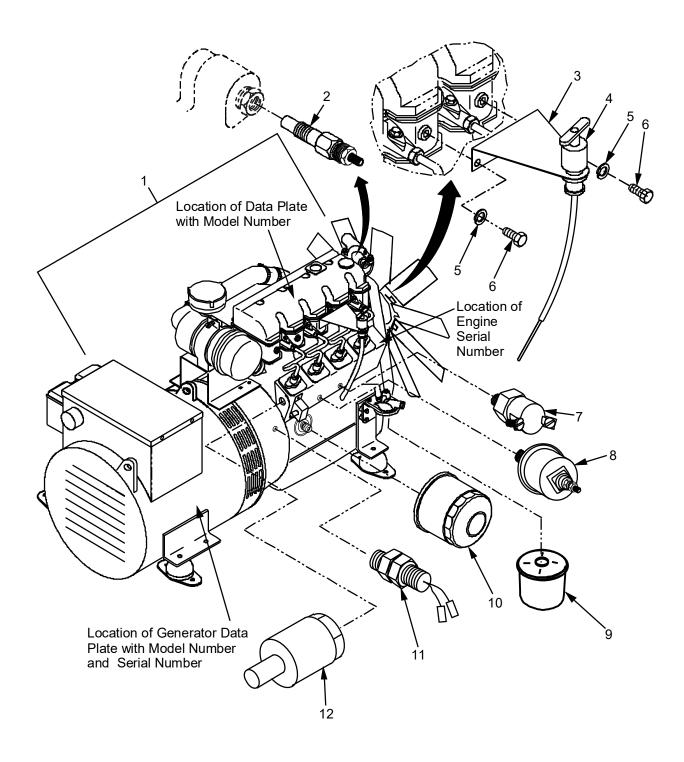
Engine-Generator Assembly 1013012 (Sheet 1 of 7).
